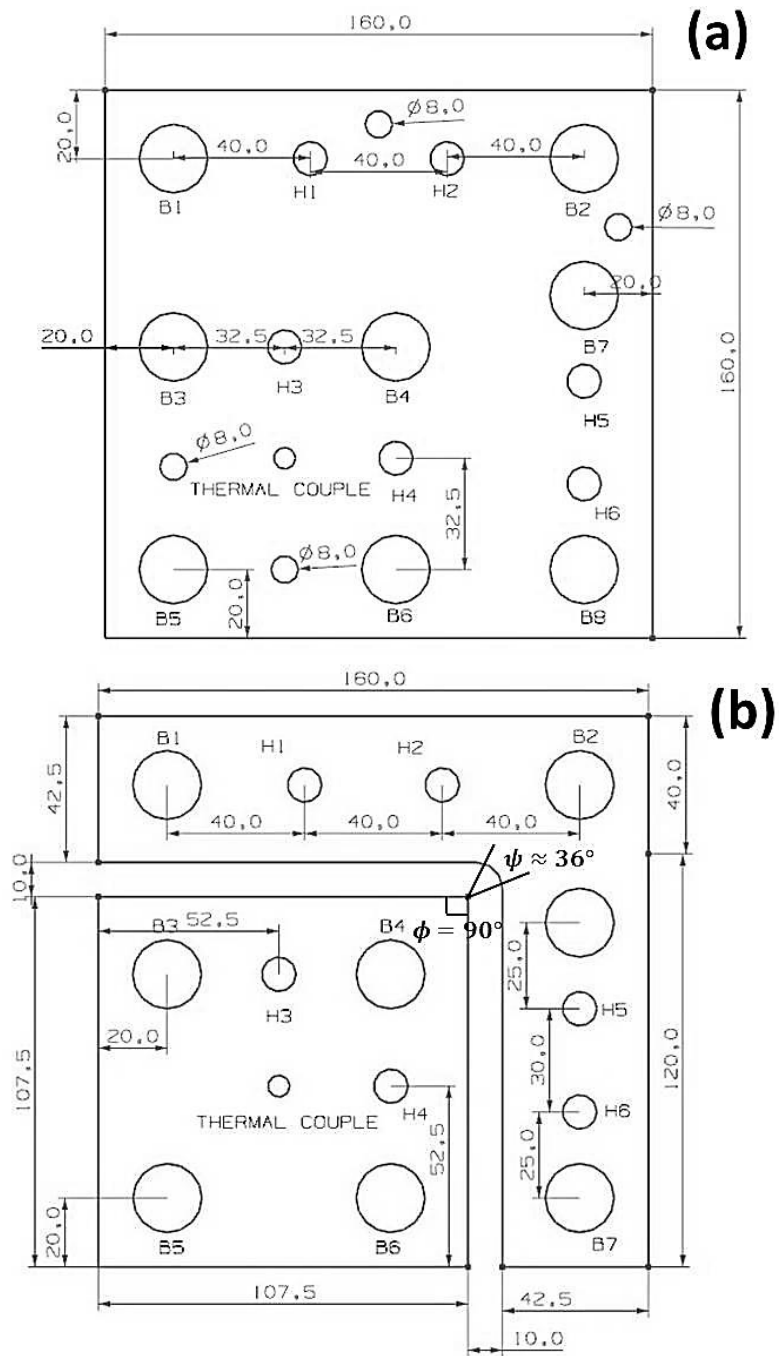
Design of the inner mould: (a) the upper part and (b) the bottom part.
